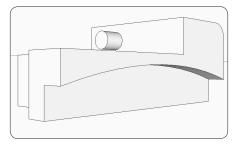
Placing an arc with the Arc Tool and then using the Push/Pull Tool to create a cove.
